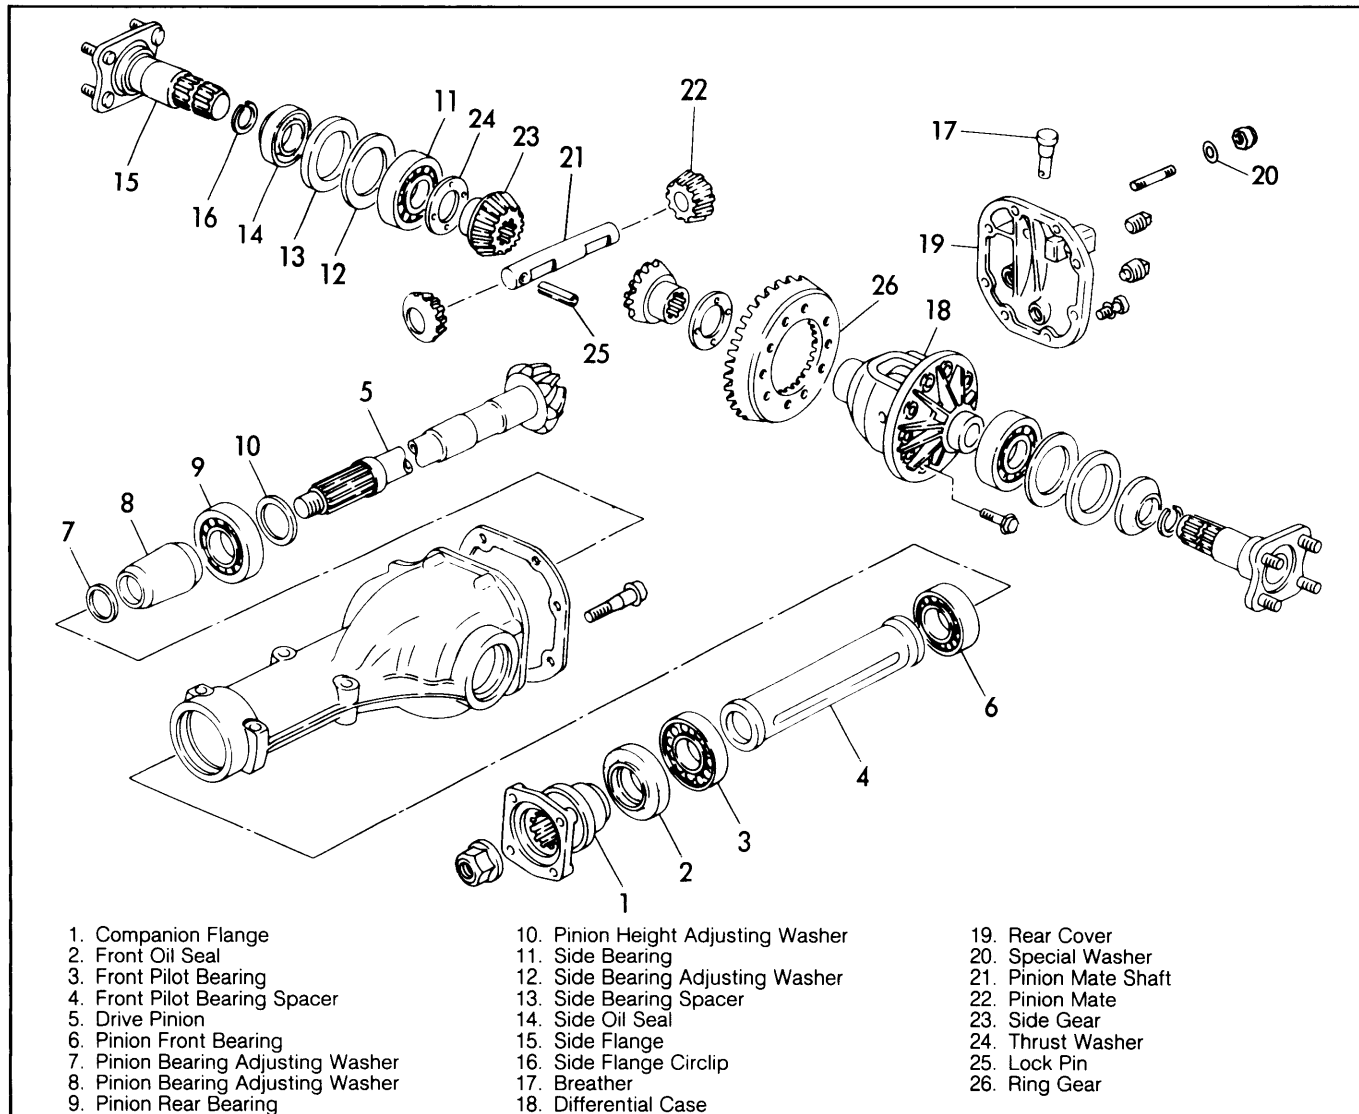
Exploded View of Datsun R180 Integral Carrier Differential Assembly
